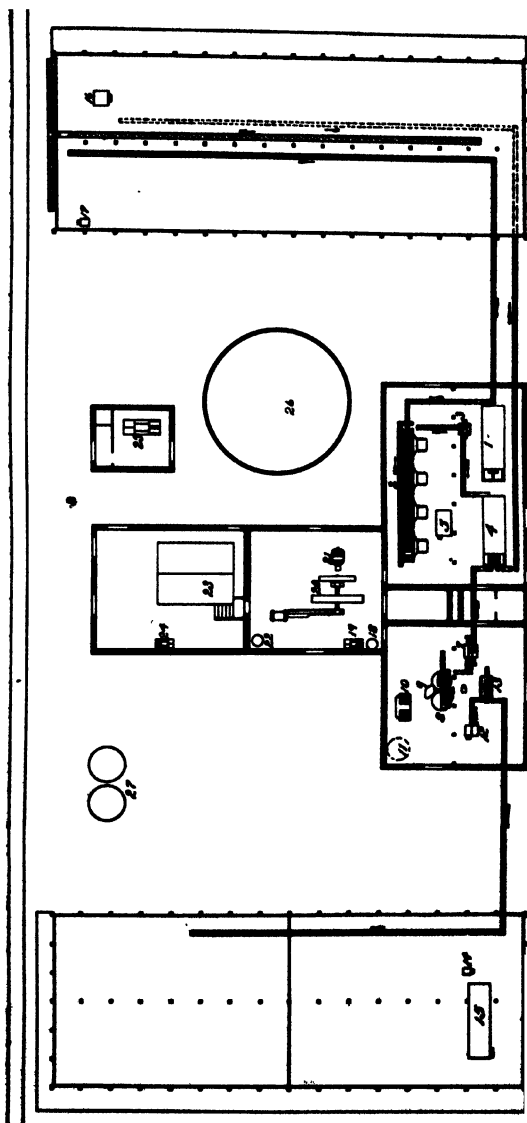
Arrangement of Machinery, 40-Ton Oil Mill, 1901.
